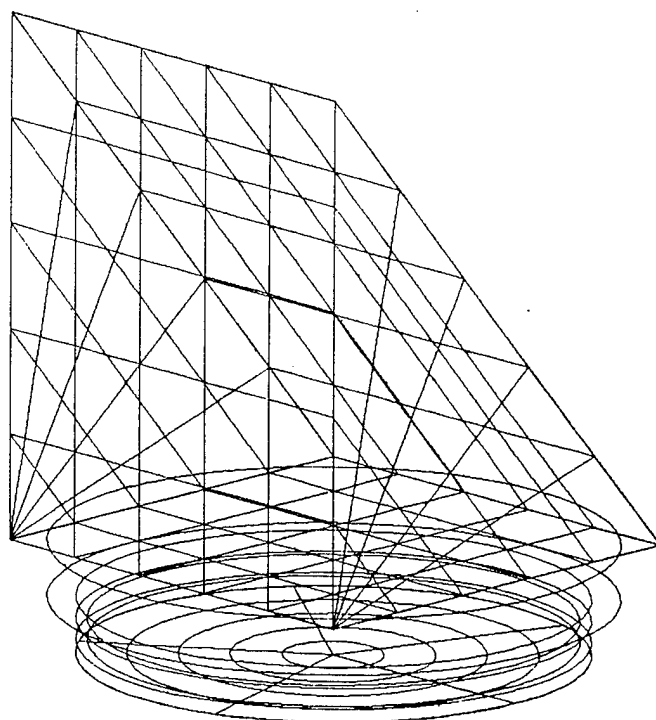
Prism Unit (Piece 4 Sheet 3)
